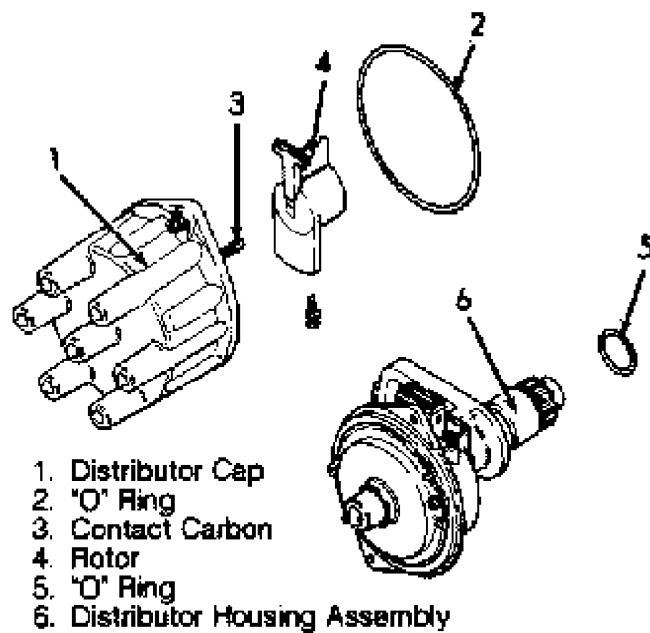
Exploded View of Distributor (Montero & Ram-50 3.0L)
